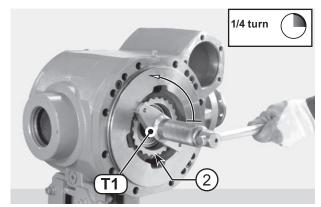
Only if ring nuts have been removed, tighten the ring nut (2) on ring gear side until clearances between pinion and ring gear are zeroed. Then, loosen by about 1/4 turn.
